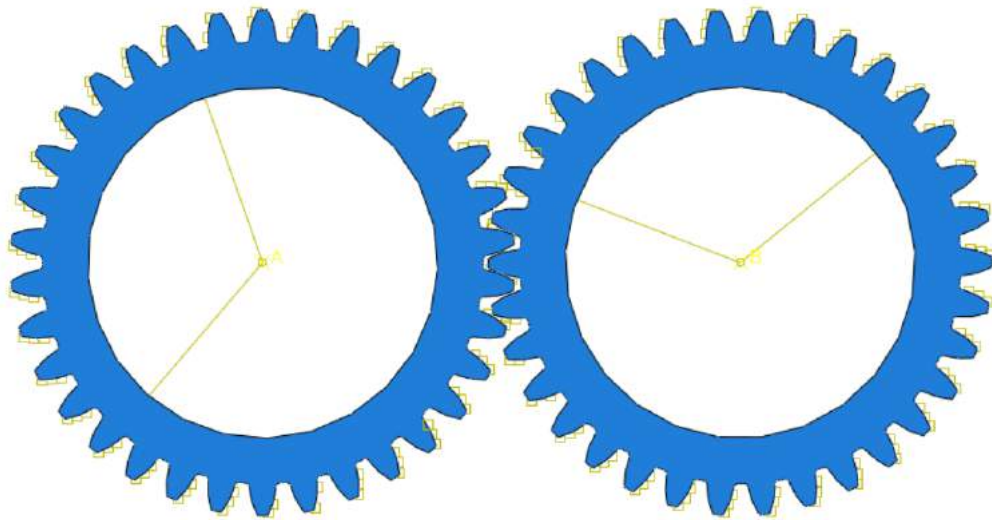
Coupling constraints applied to the gear pair, front view.
